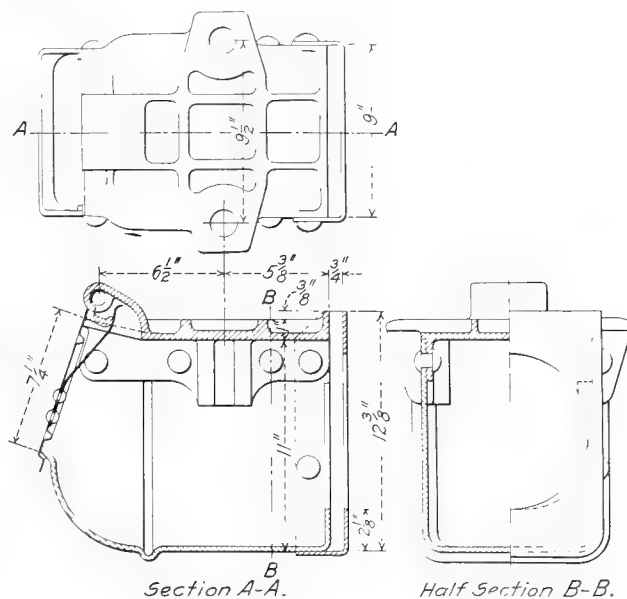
Kensington Steel Journal Box with Inside Lid Spring.
